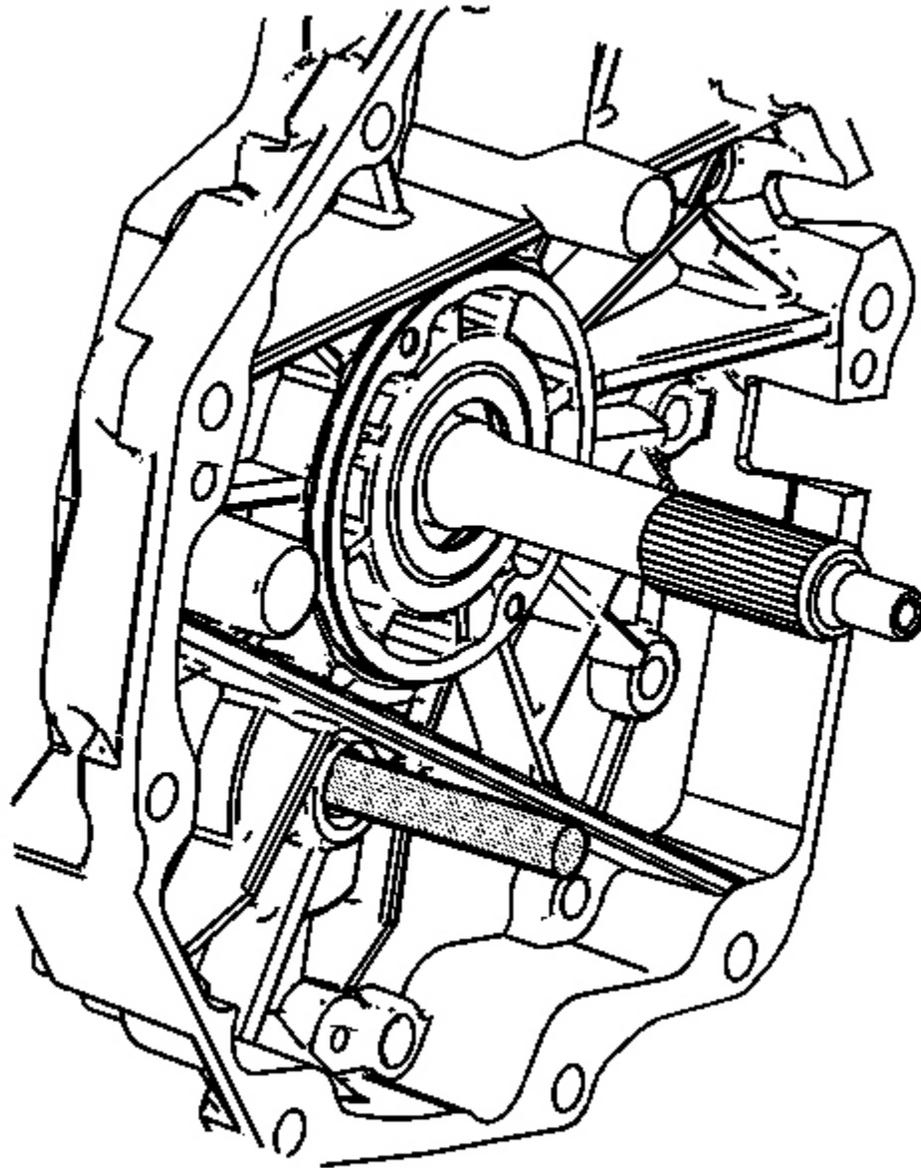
Installing/Removing J 39444-2 Through Adapter Plate Plug Hole
